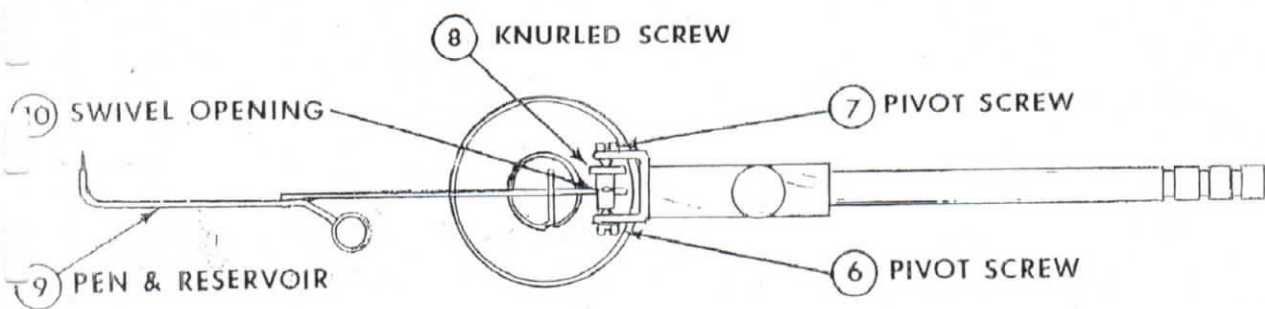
7066-901 STUDENT TAMBOUR (SHOWN WITH INK WRITING PEN)
